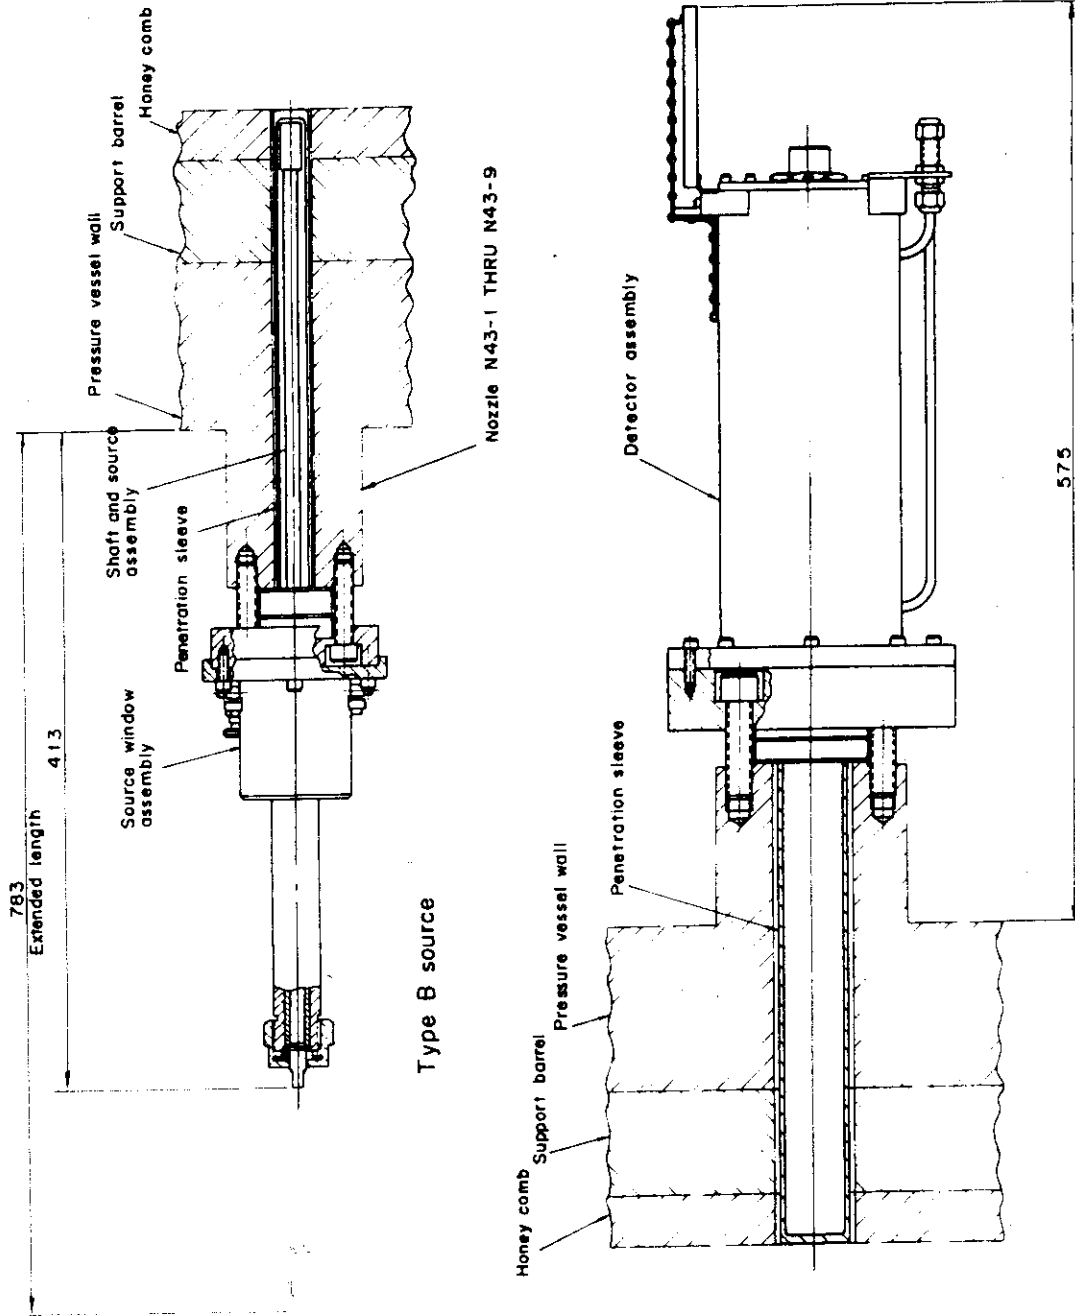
Single-beam γ -densitometer (Type B) assembly installed in upper plenum and below end box tie plate
